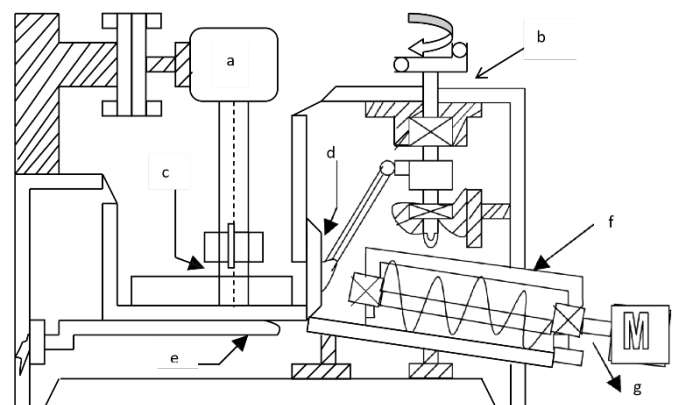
Schematic view of the mono-bloc mixer extruder machine. a - electric motor, b - mechanism for opening mixer gate, c - mixing impeller, d - mixer gate, heating element, f - screw extruder, g - material discharge
